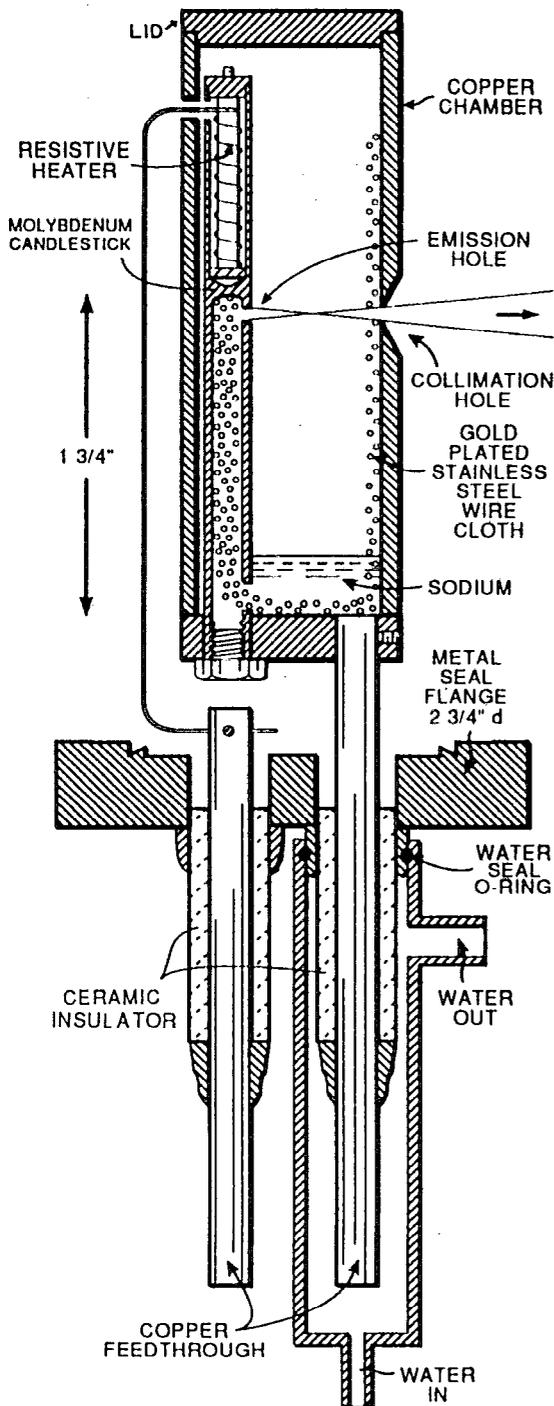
Cross-sectional view of the candlestick atomic beam source. The assembly is mounted on one flange and fits inside a 2 3/4 in. UHV cross.
